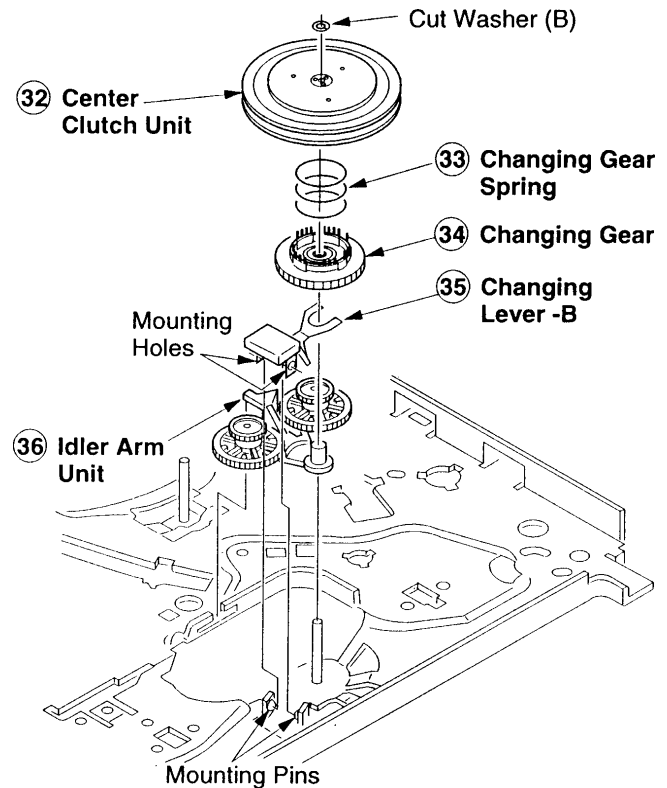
Center Clutch Unit/Changing Gear Spring/Changing Gear/Changing Lever-B/Idler Arm Unit Removal
